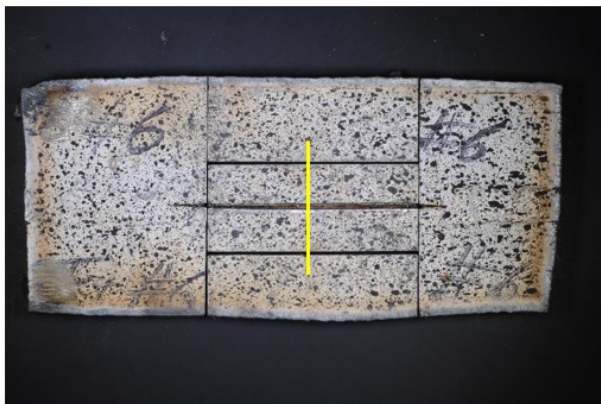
Photos of sample 5 showing though crack covered in corrosion products, the failed surface appears to be ductile fracture.
